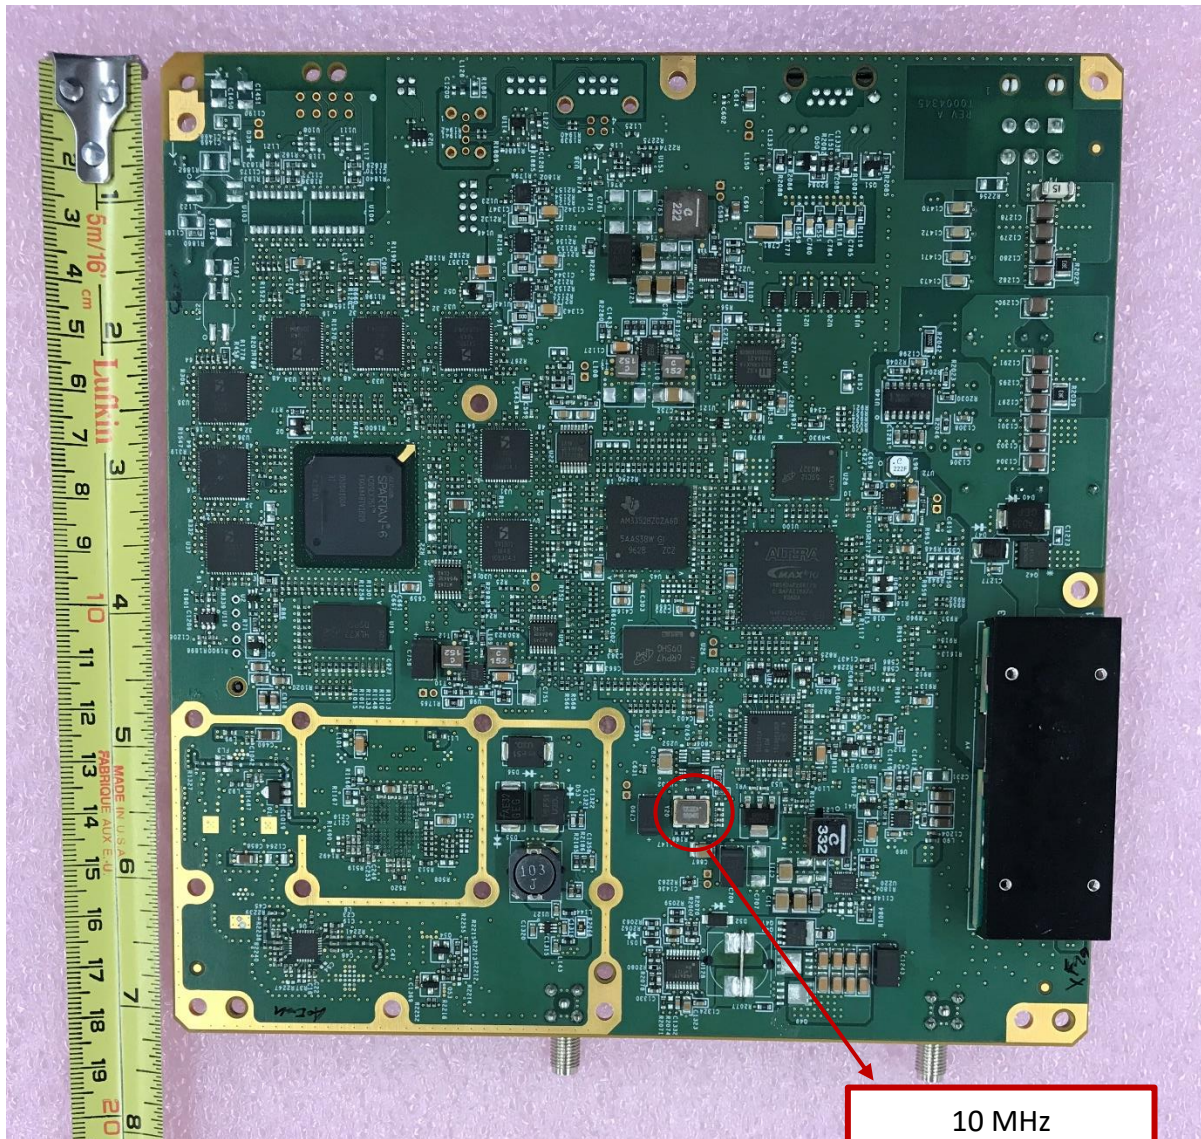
Gen 1.0 Pearl Mobile PCBA, secondary side
